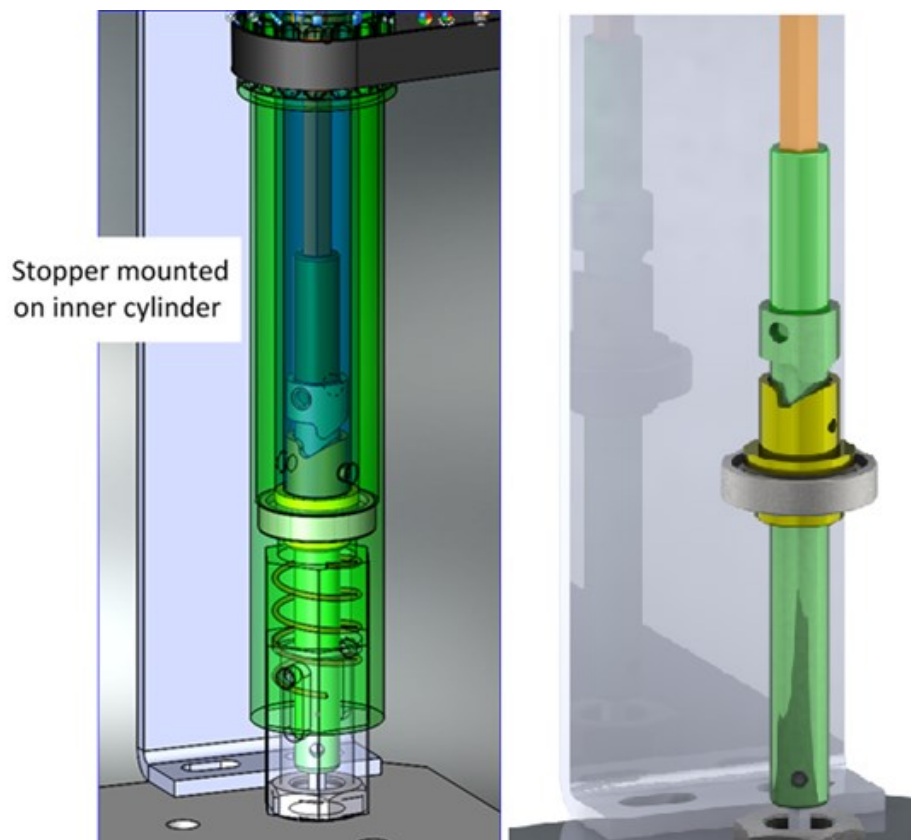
Mechanical stopper mounted on inner cylinder.
